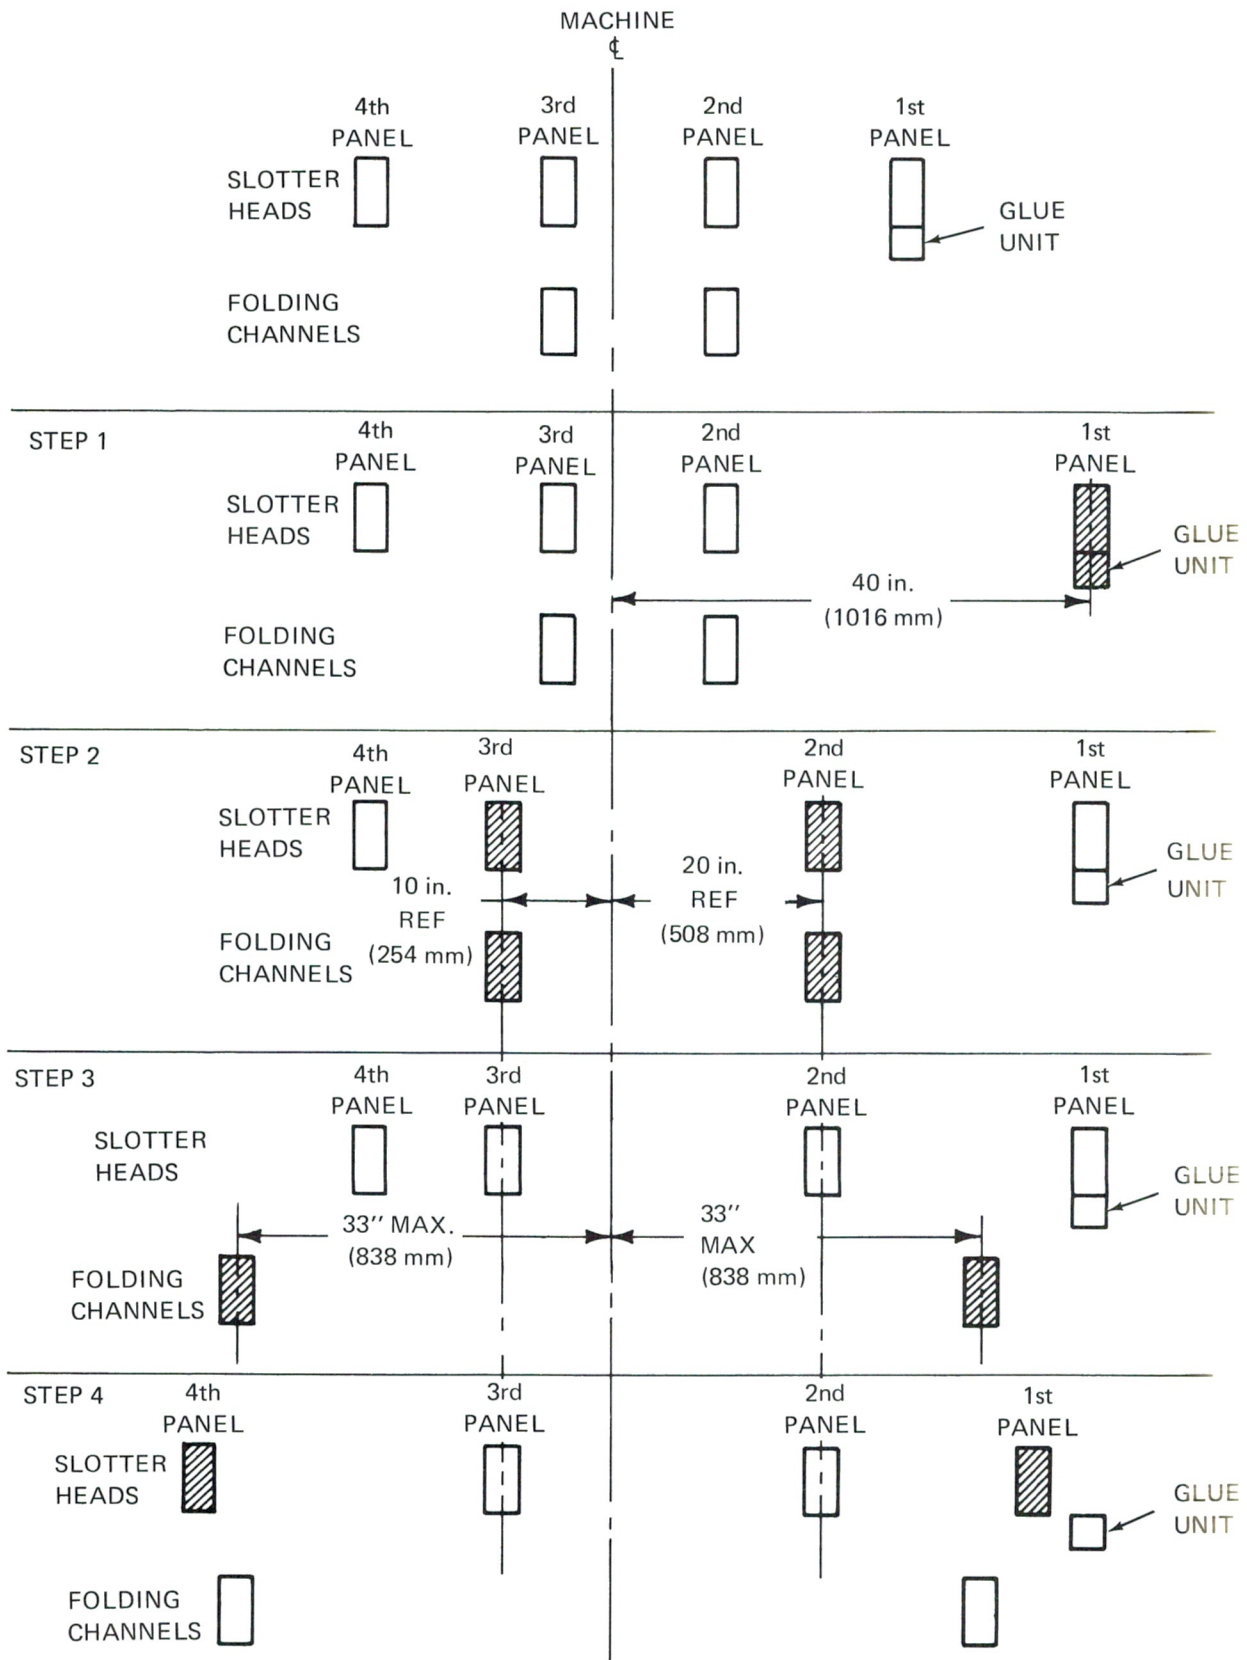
INDEPENDENT FOLDING SECTION ADJUSTMENT
